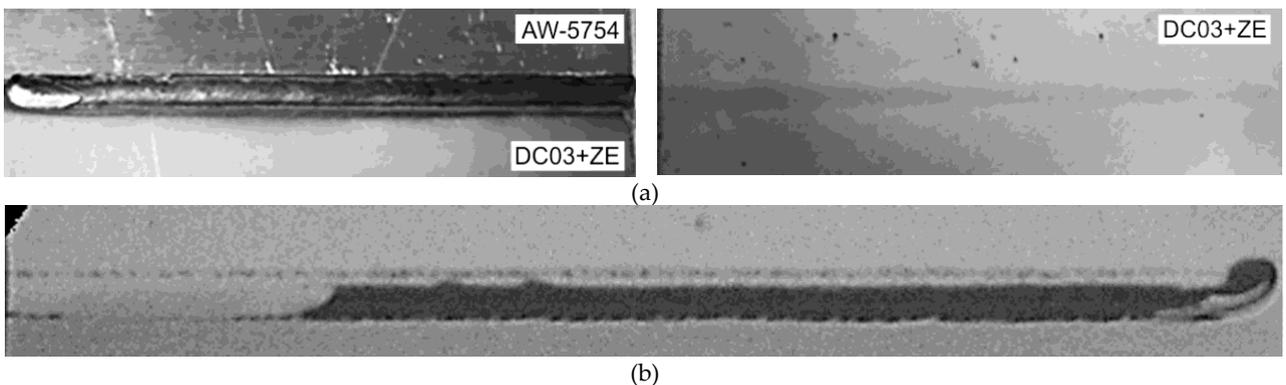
Braze welded joint steel DC03 + aluminum AW-5754, brazing consumable AlSi5: a) both sides of the joint; b) C-scan of the joint
